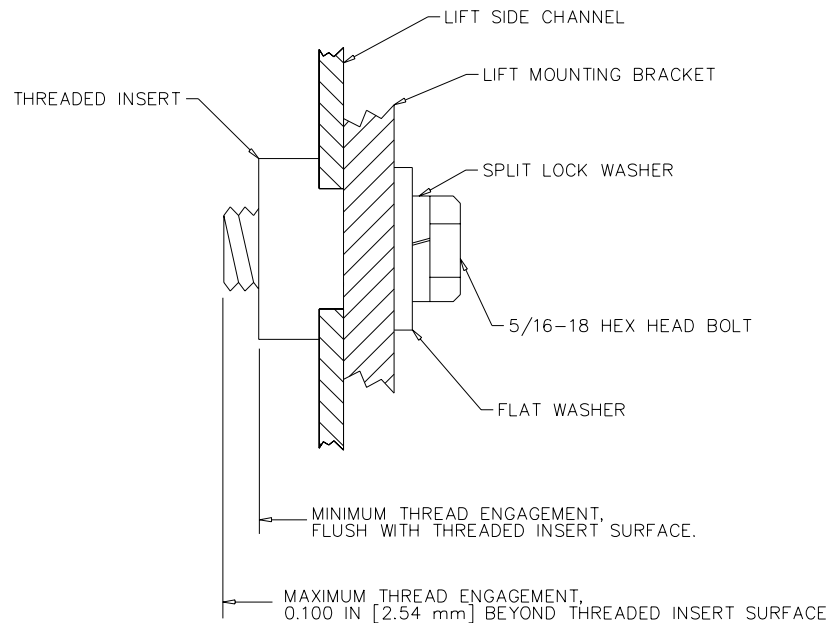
LIFT MOUNTING ATTACHMENT POINTS
